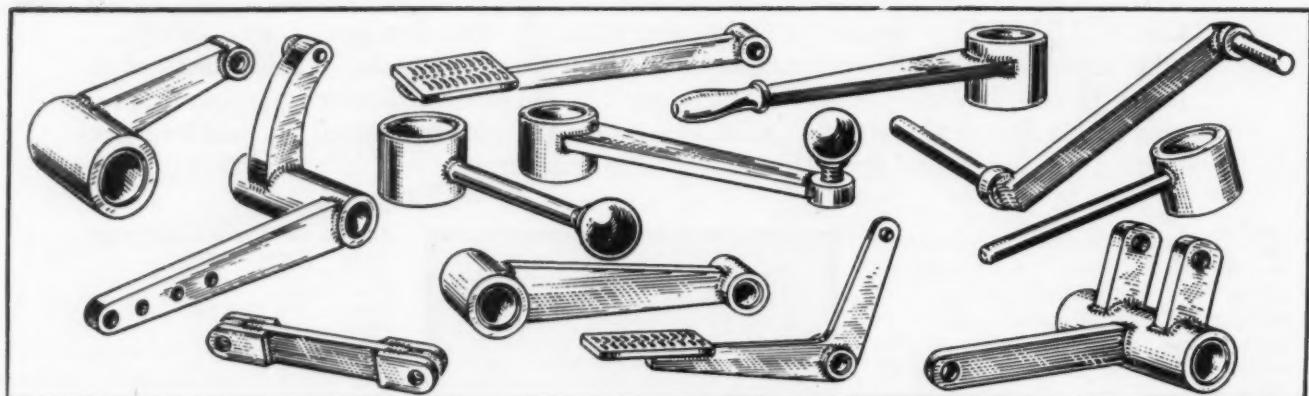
Typical machinery operating levers that are being weld-fabricated at lower cost with arc welding.
